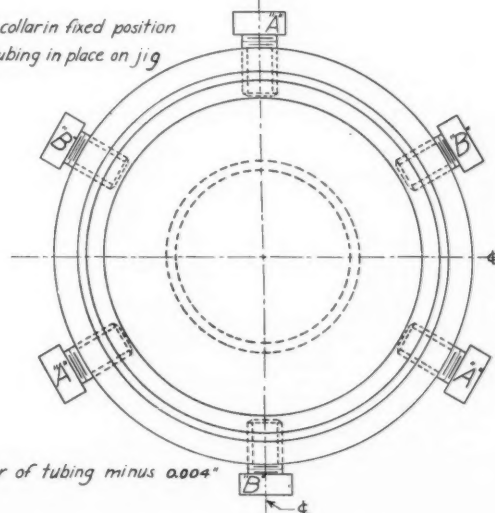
Detailed sketch of the jig used for cutting and machining thin-walled steel tubing for soil sampling
